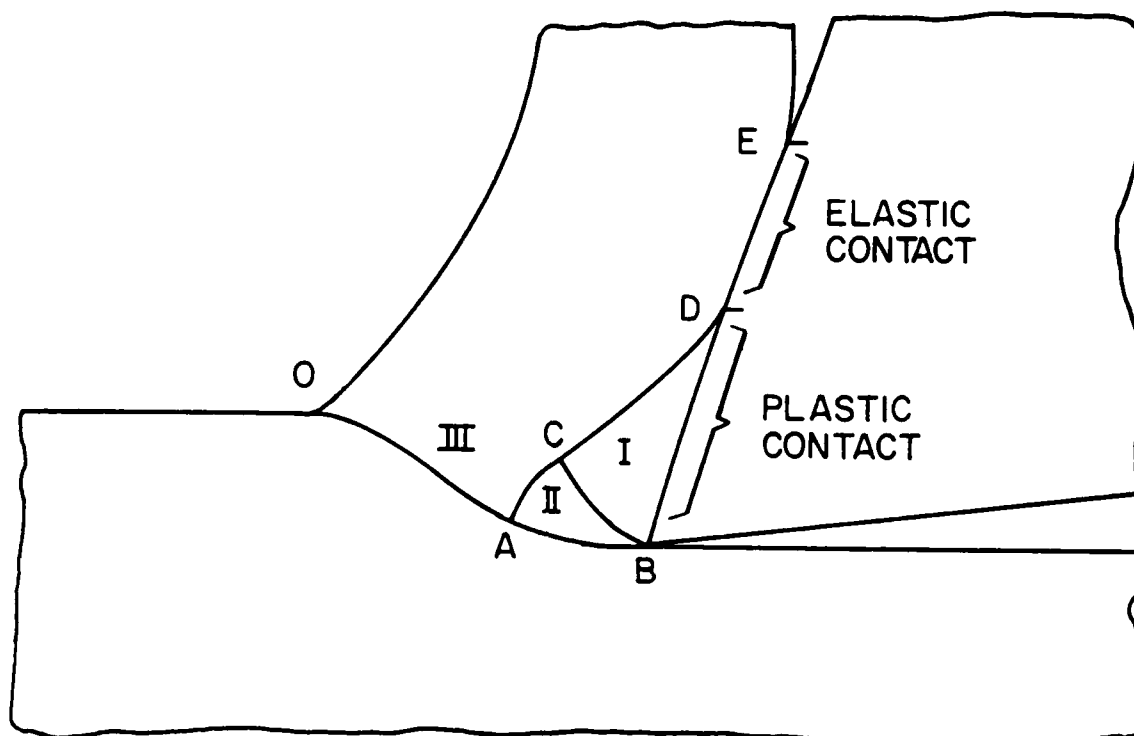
Slip line field applicable to chip formation during orthogonal machining
